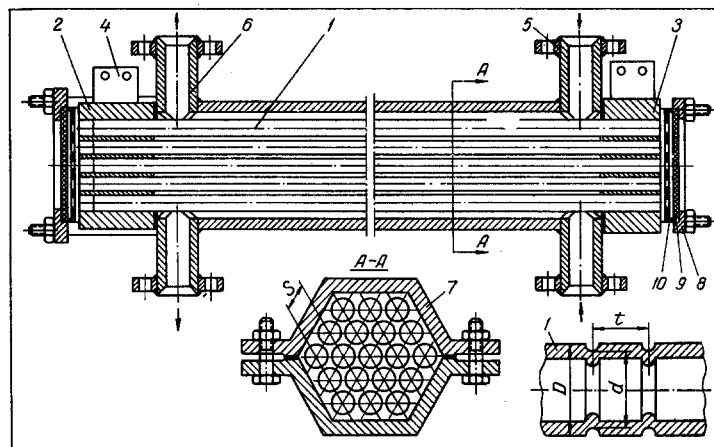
Experimental heater (test section No. 1): 1) tube with ring grooves; 2) upper tube plate; 3) lower tube plate; 4) power terminal; 5) inlet connection; 6) outlet connection; 7) housing; 8) clamping flange; 9) cover; 10) fiberglass insulators for thermocouple leads.
